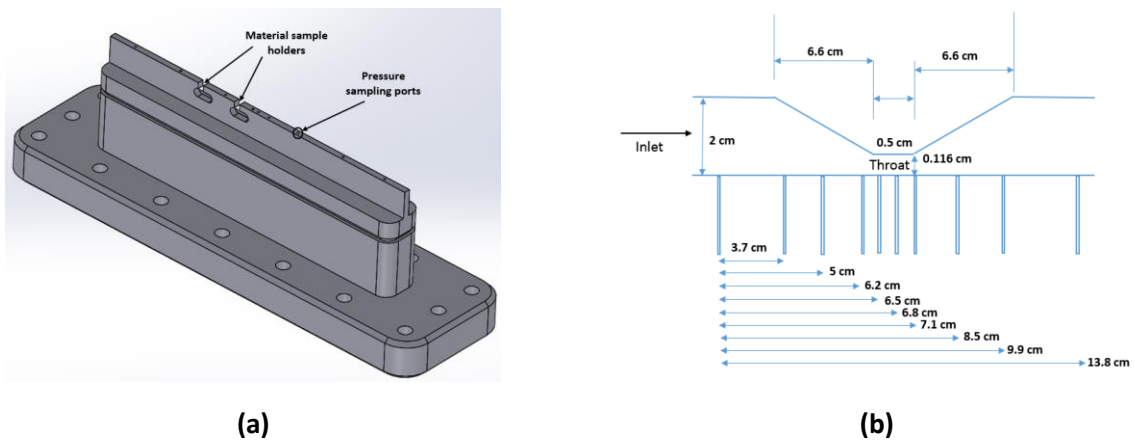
(a) CAD model of the bottom flange showing the pressure sampling ports and material sample holders (b) Converging-diverging profile dimensions along with the locations of the pressure sample ports.
